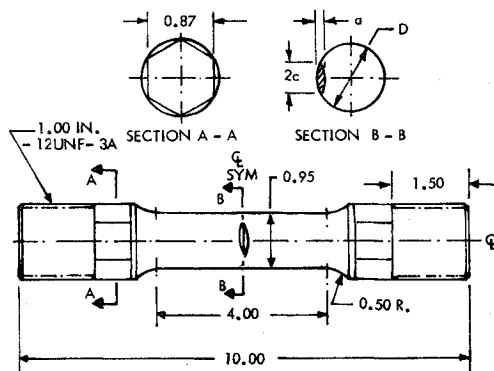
Surface flawed cylindrical specimen of 2219-T87 aluminum.
